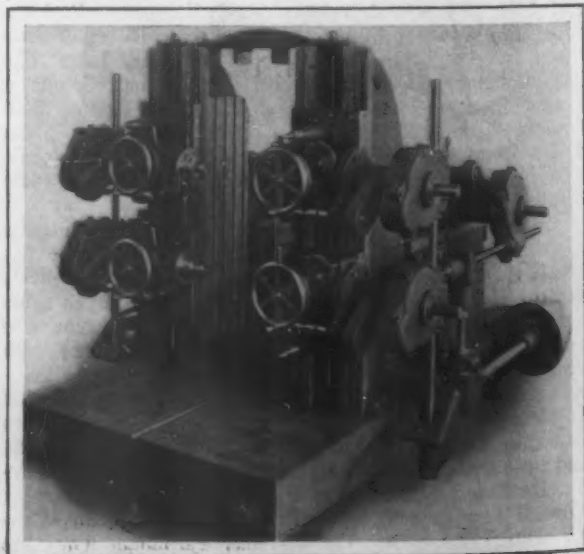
Front View of a New Six-Spindle Machine for Boring and Reaming Heater Sections Built by the Beaman & Smith Company, Providence, R. I.
